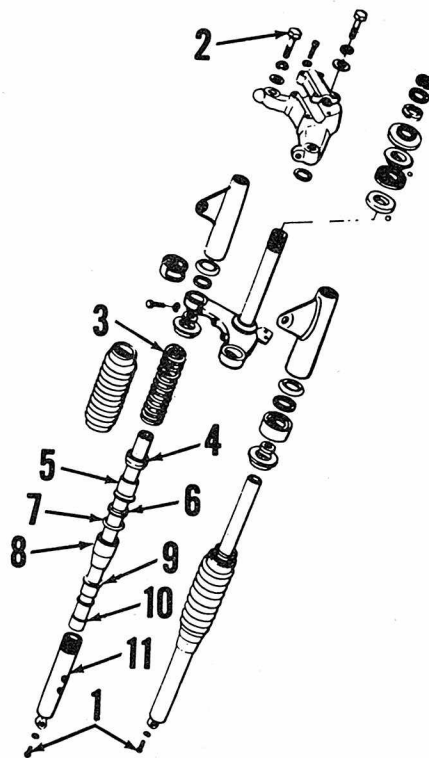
Exploded view of the front suspension. Oil is drained at screw (1) and filled at screw (2).
